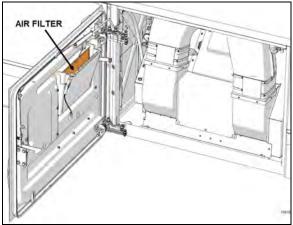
EVAPORATOR DOOR FRESH AIR FILTER
